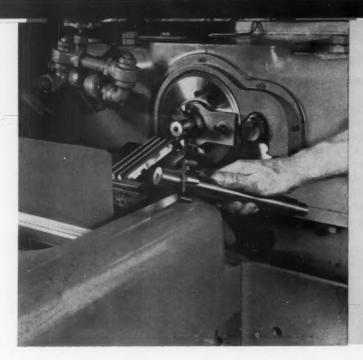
Five-tooth gear segments are produced on forgedsteel pitman shafts by feeding reciprocating rack cutter past the rotating work.
